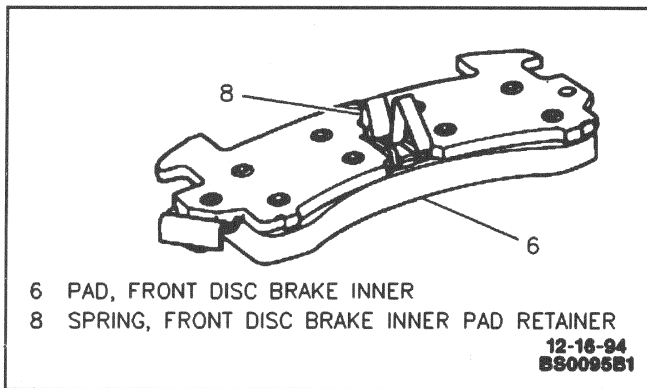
Front Disc Brake Inner Pad Retainer Spring
